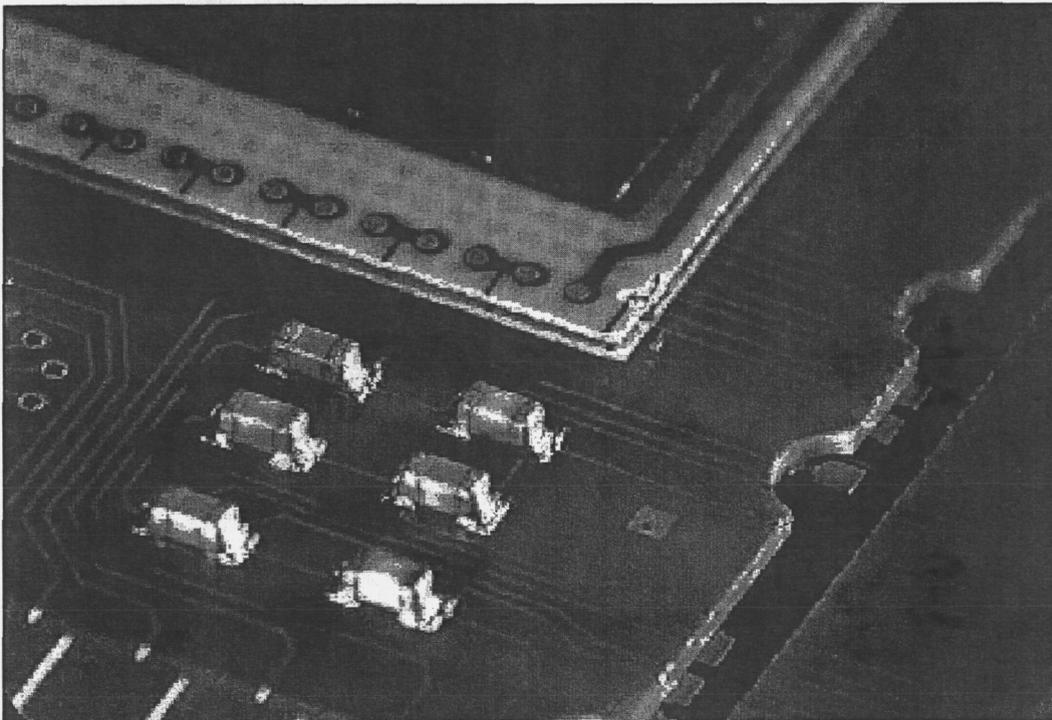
Photograph of a Two-Package Stack Assembled to a PCB. (Courtesy of Amkor)
